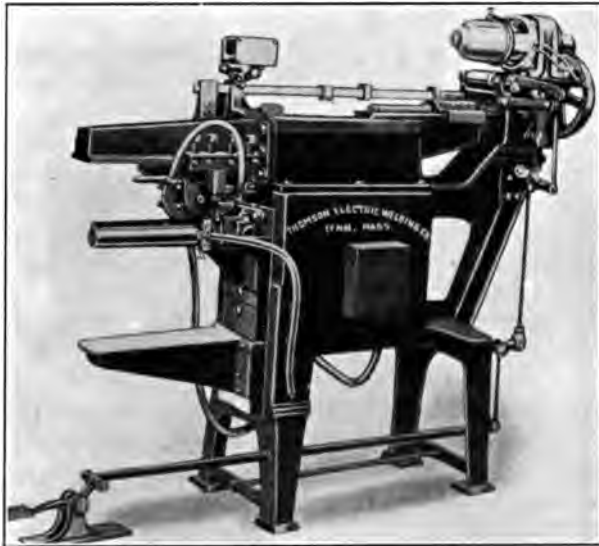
ELECTRIC SEAM-WELDING MACHINE.
